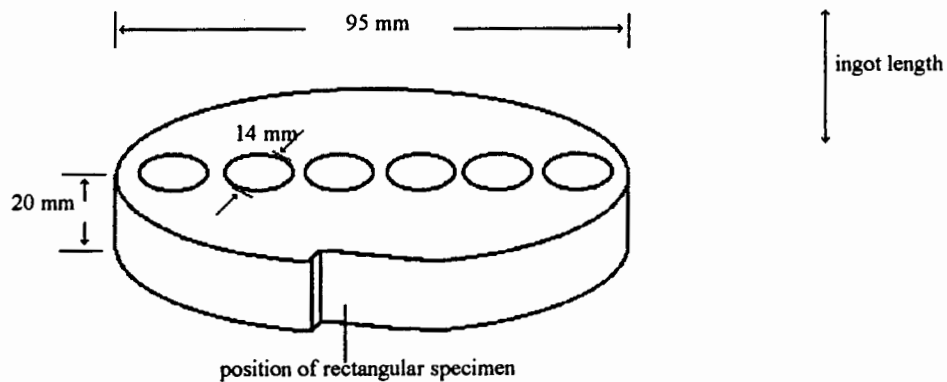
A disc machined from an ingot of plasma-arc-melted Ti-48Al-2Mn-2Nb (at.%) showing the disc-shaped coupon specimens and the position of the rectangular specimen which was machined from the side of the ingot.
